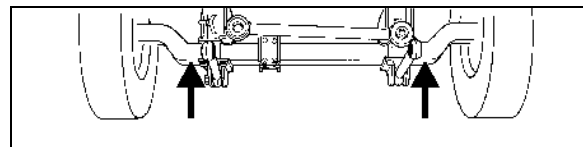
JACKING POINTS ON I-BEAM FRONT AXLE
